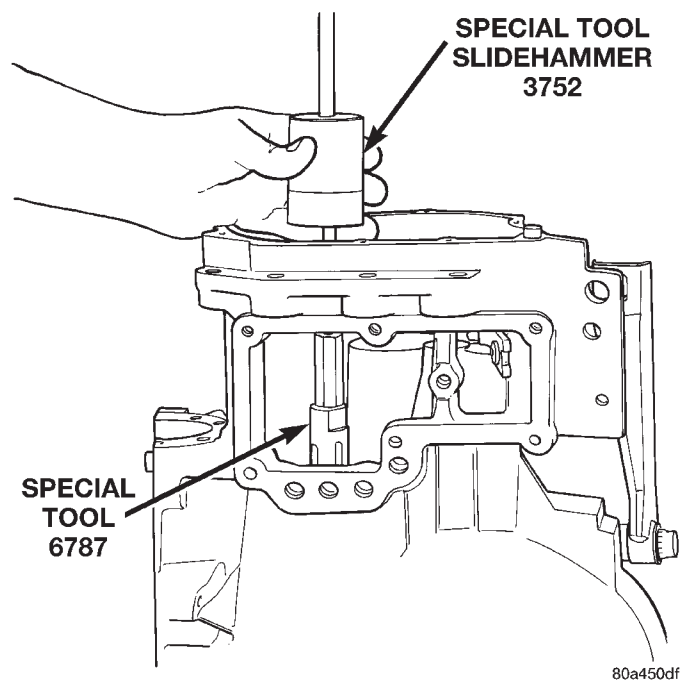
Remove Intermediate Shaft Front Bearing Cup
